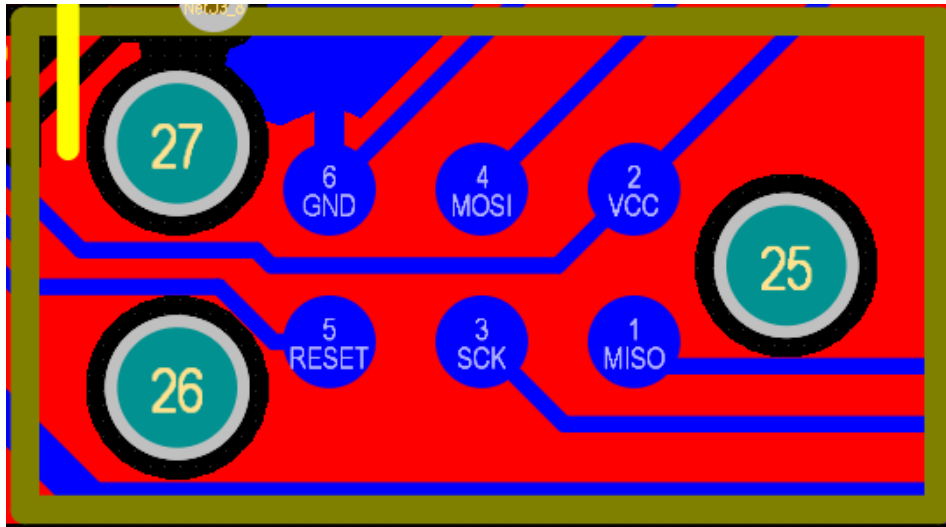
Six Pin ISP Contact Pads on the smart motor driver boards [1]
